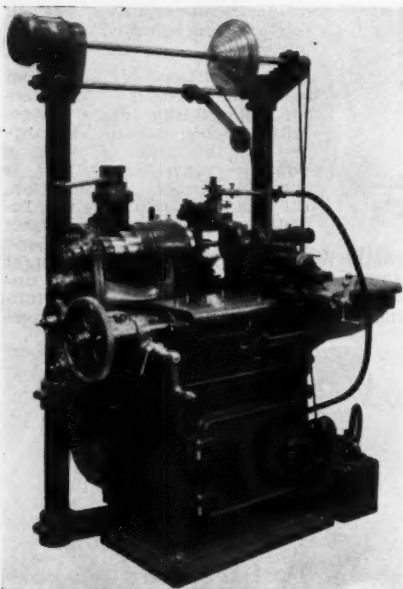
Duplicate operating controls on the left side of machine. The grinding of left-hand end mills or face mills is simplified by eliminating the necessity of a makeshift tooth rest set-up.
